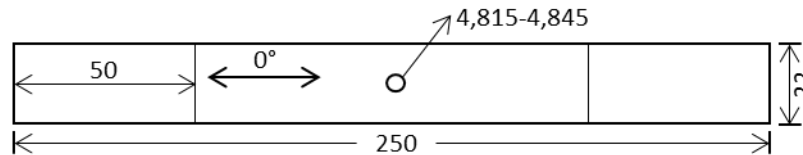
Coupon geometry for open hole tensile test, according to AITM 1-0007. All dimensions are expressed in mm.
